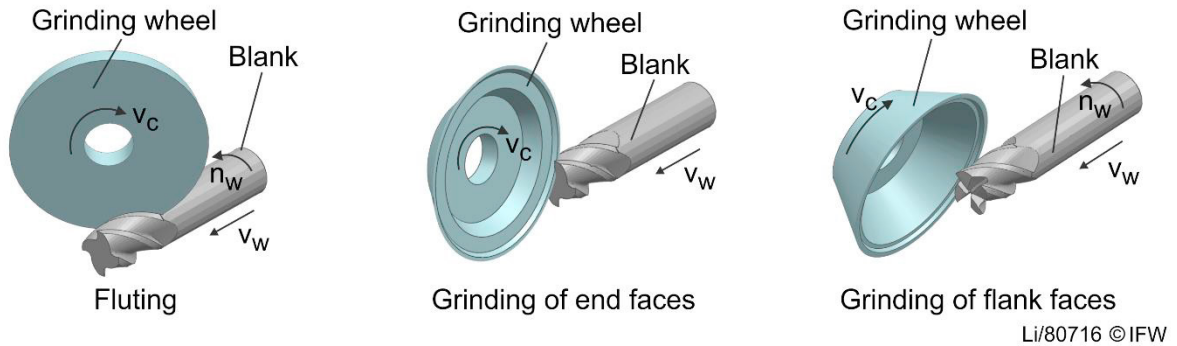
Manufacturing of shank tools ( $n_w$ : rotational speed of workpiece;  $v_c$ : cutting speed;  $v_w$ : axial feed of the workpiece).
